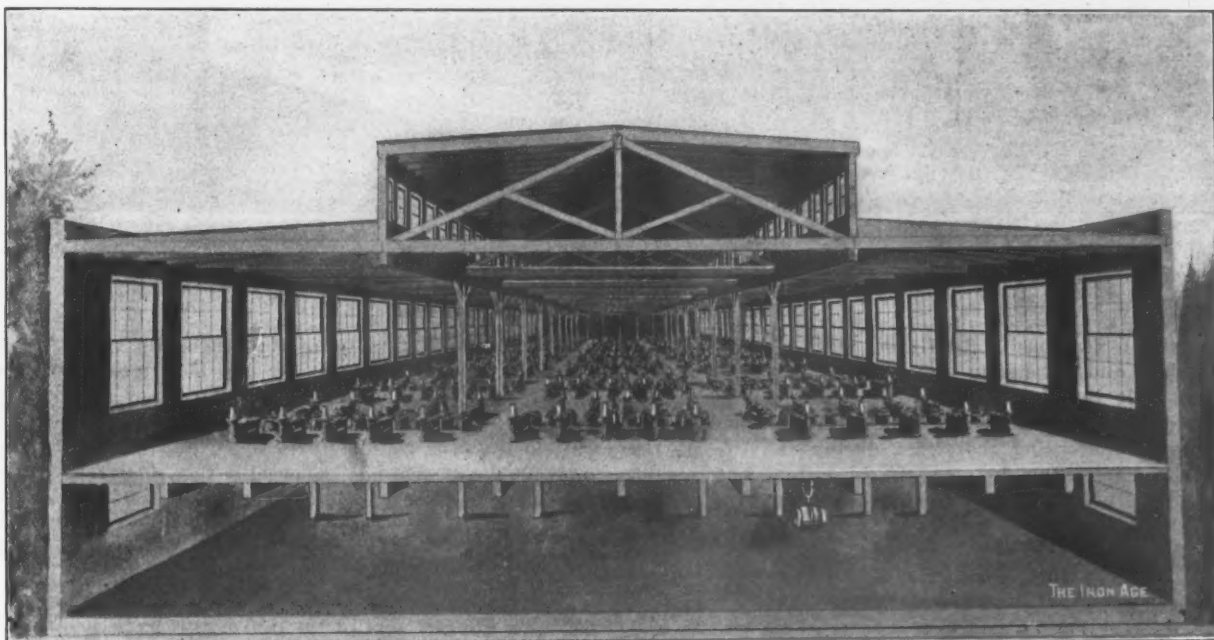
Arrangement of the Shenandoah Steel Wire Company's Fine Wire Room.
